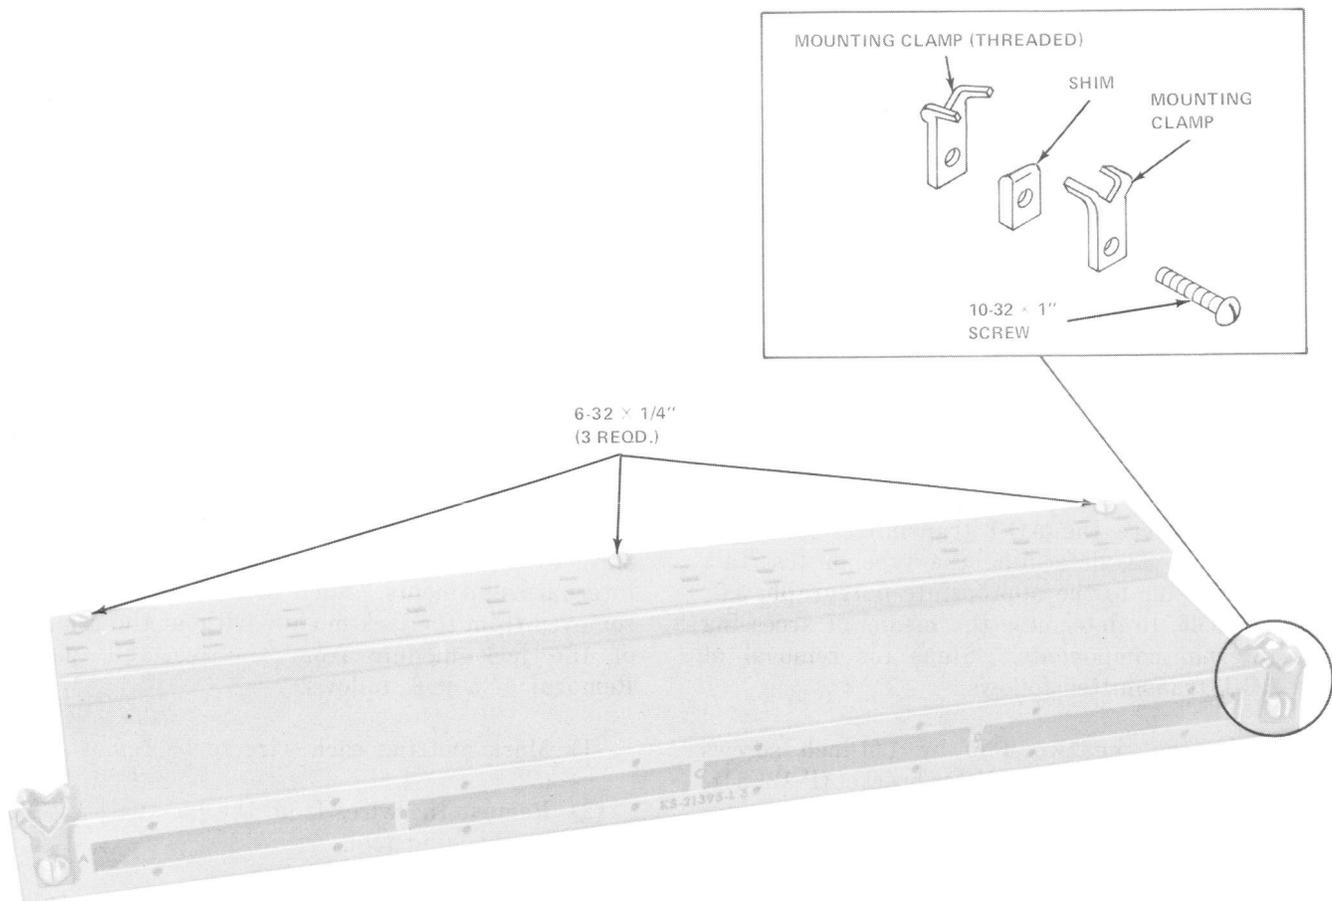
KS-21395-L3; ED-6C110-10, G63 Test/Talk Panel for 336-type Terminal Strip Mounting
